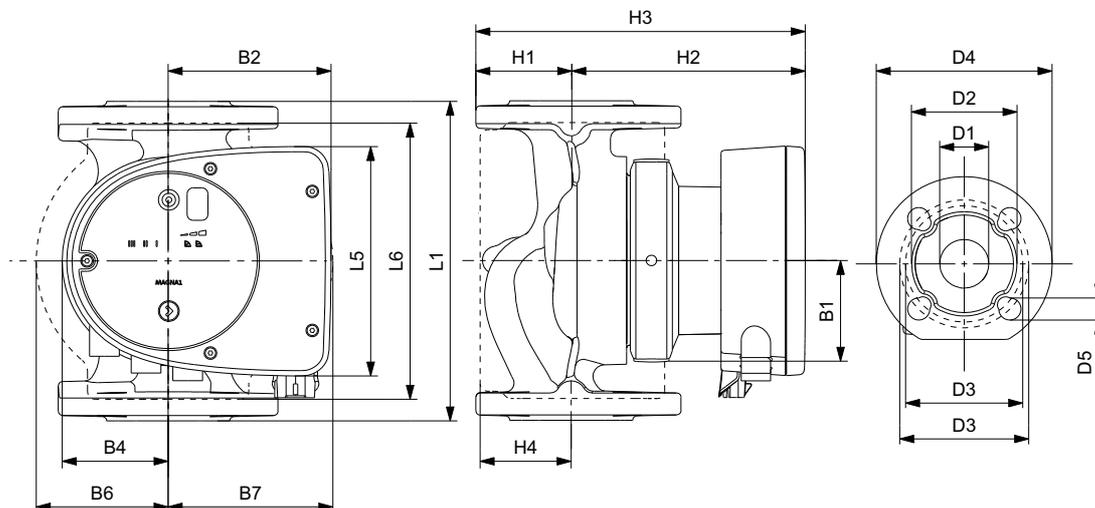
Single-head pump dimensions, plug-connected versions, flanged version
